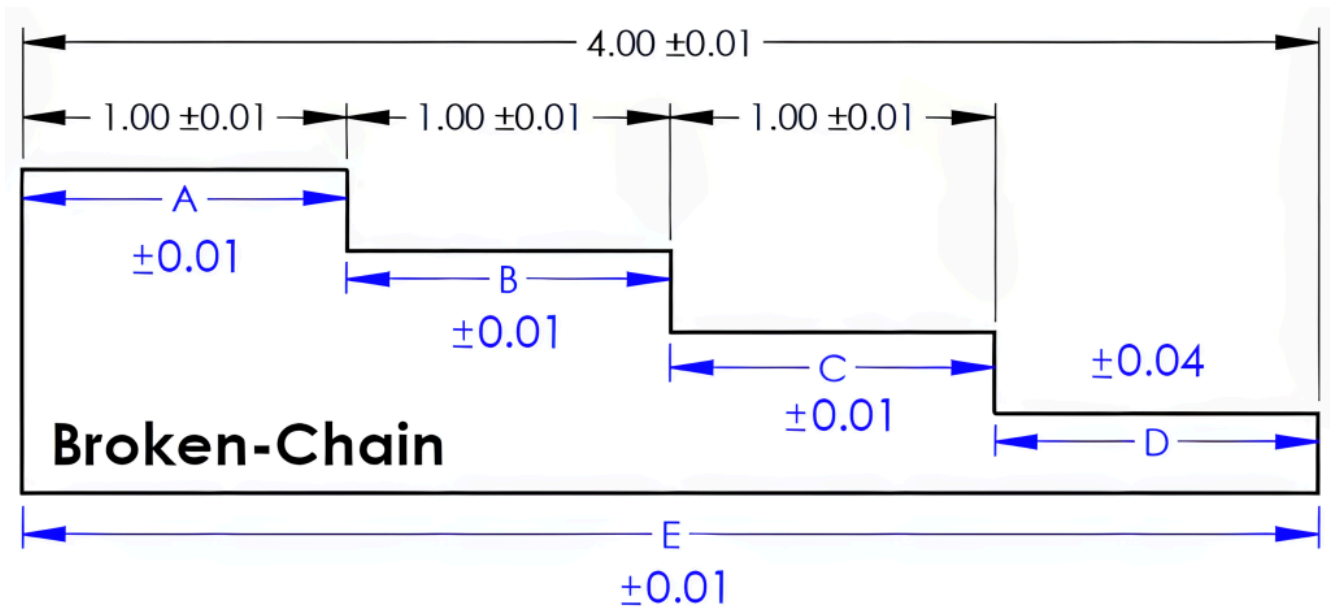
Broken-chain dimensioning effects on tolerance.
